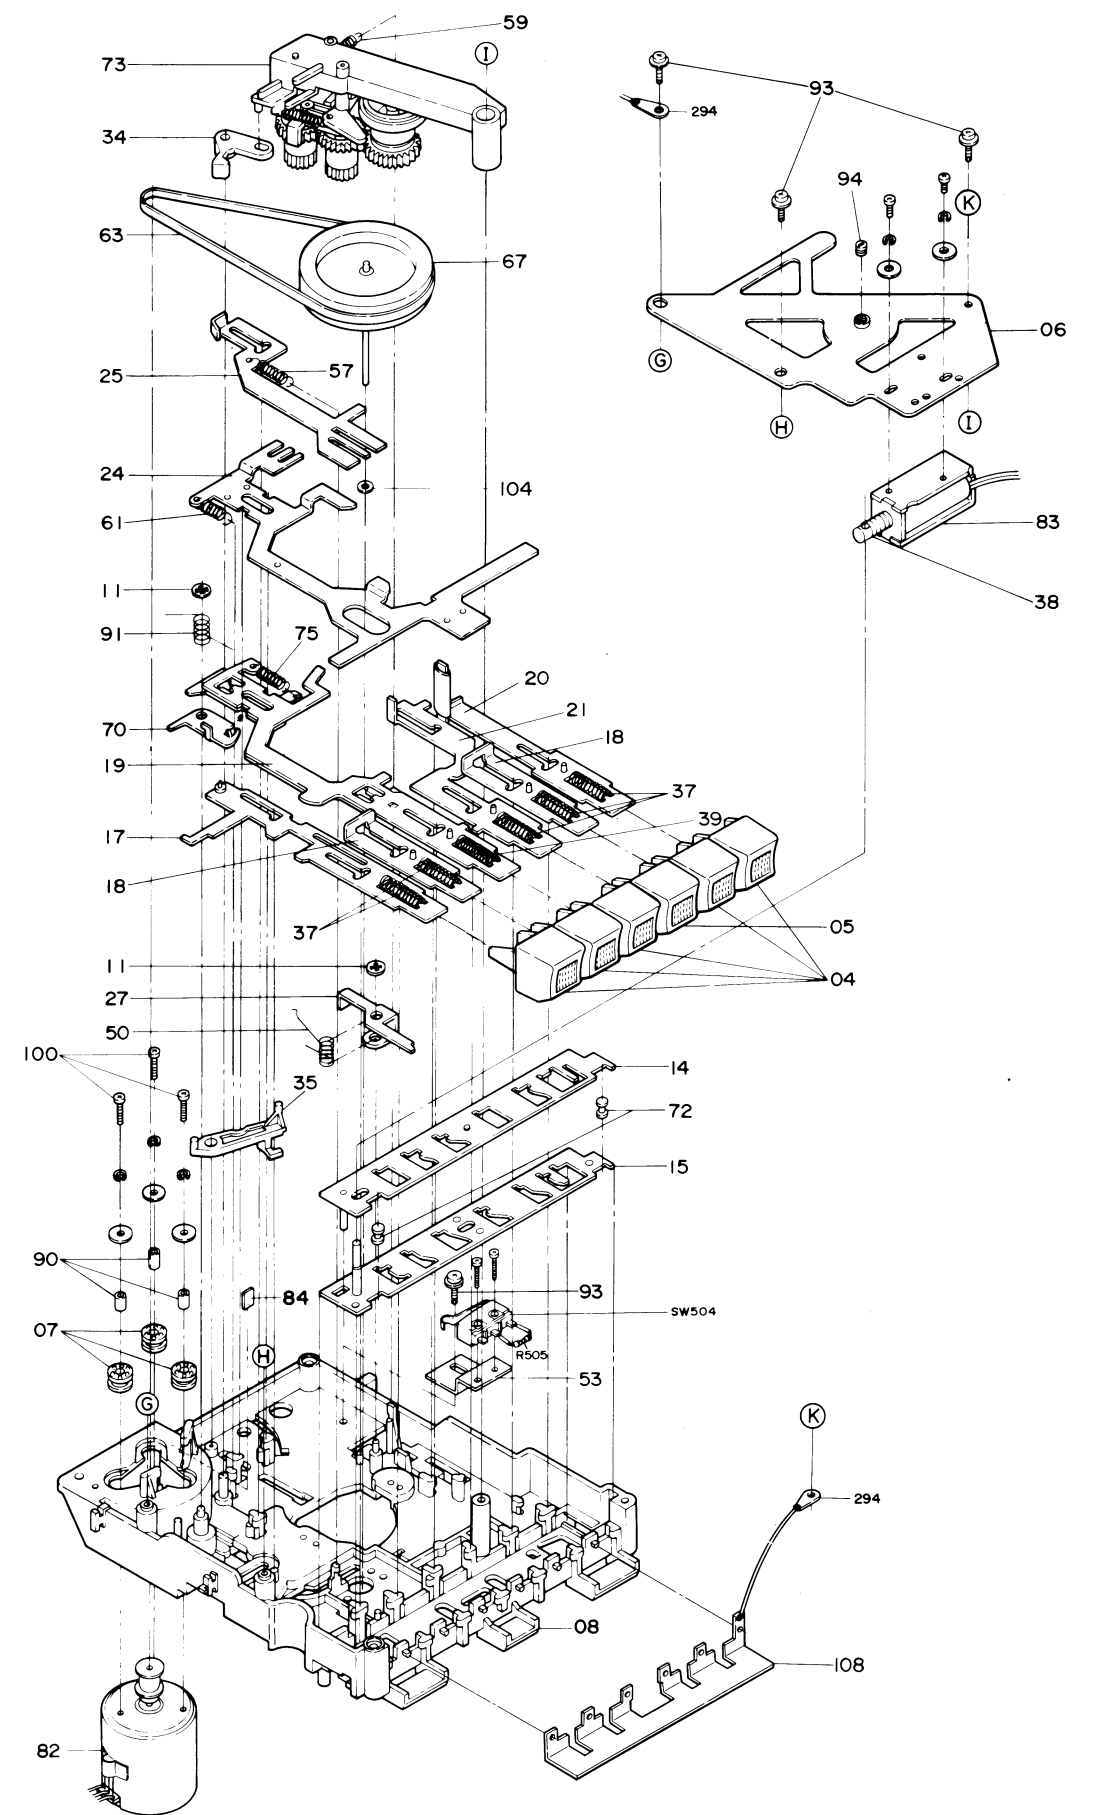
MECHANISM EXPLODED BOTTOM VIEW
